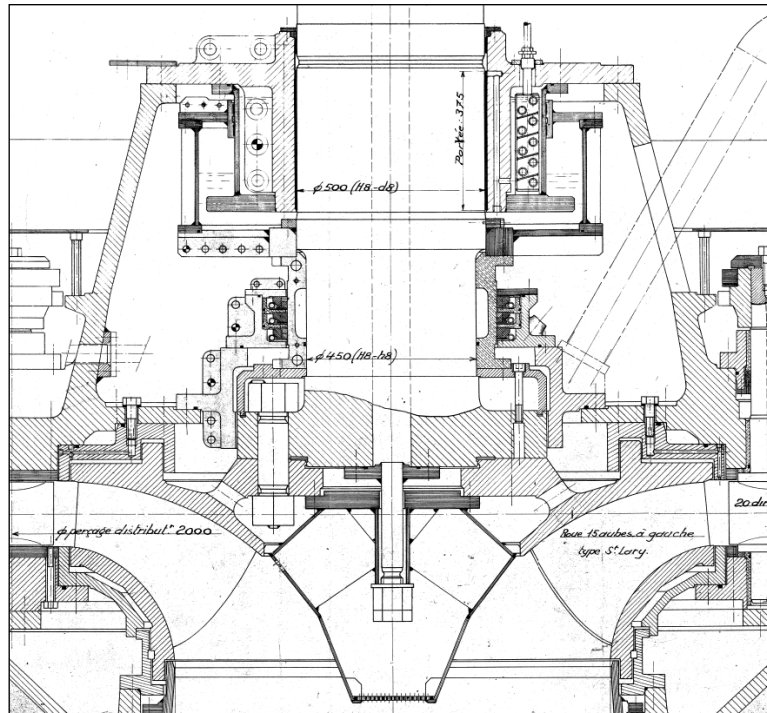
Original Bearing & Shaft Seal – C.H. de Prada
